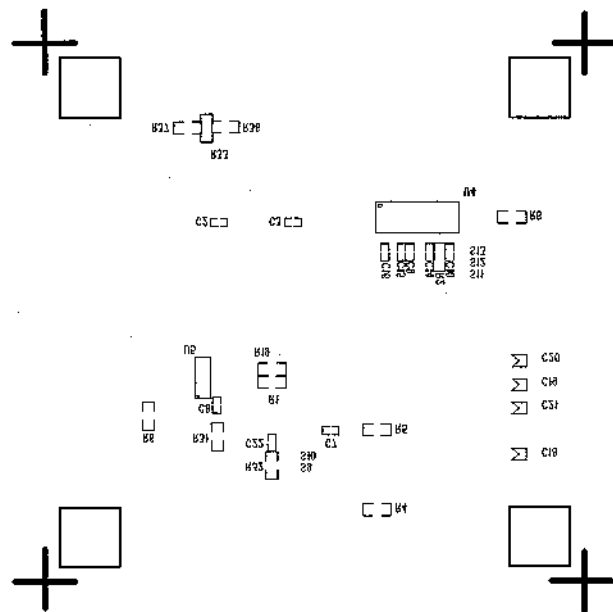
Printed Circuit Board Bottom Side Silkscreen
